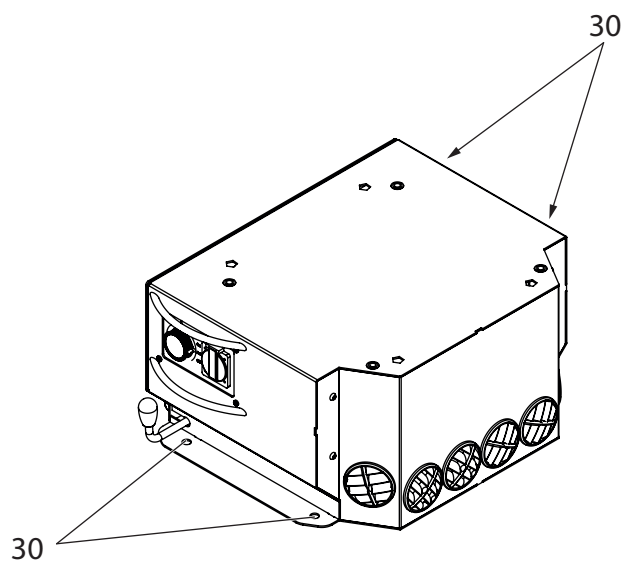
Mechanical installation – spacer 52832; 43666; 53153 (dimensions in mm)
